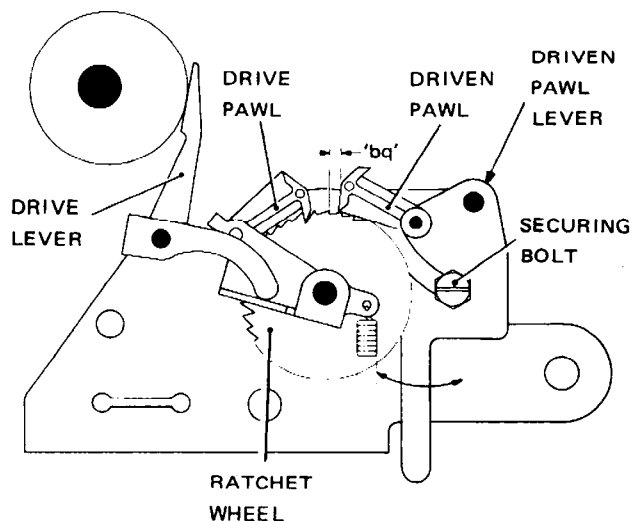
MOTOR CONTROL SWITCH – RETENTION PAWL CLEARANCE
